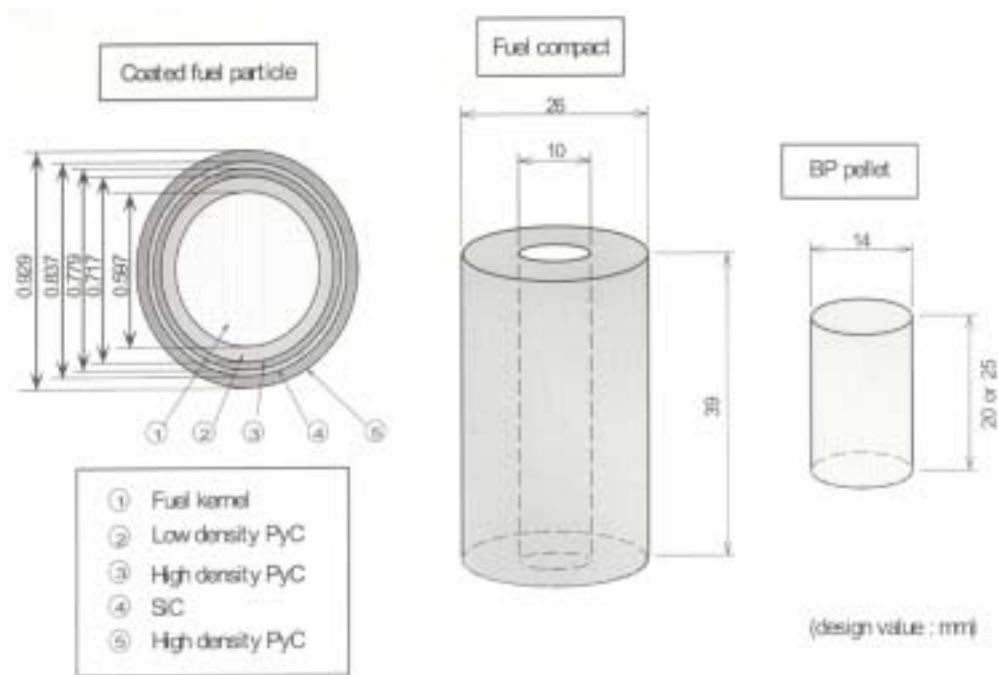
Coated fuel particle, fuel compact and burnable poison pellet.
